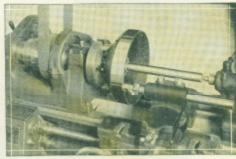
Truing the Surface of the Brake Drum of a Budd Disc Wheel.
